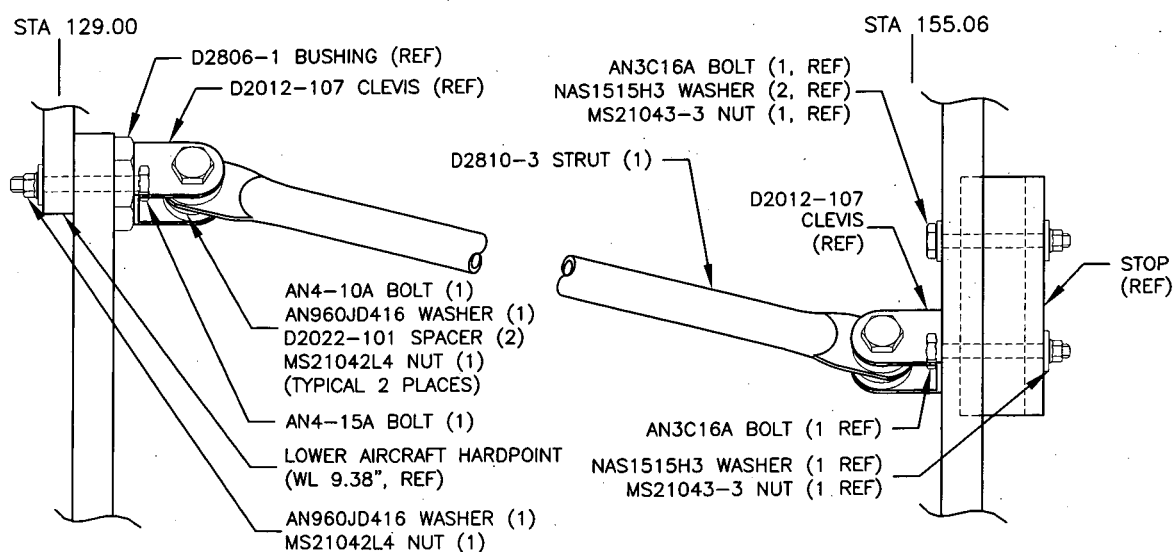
Strut Detail for D412-630-011/-012 Heli-Access-Step™ Installation
